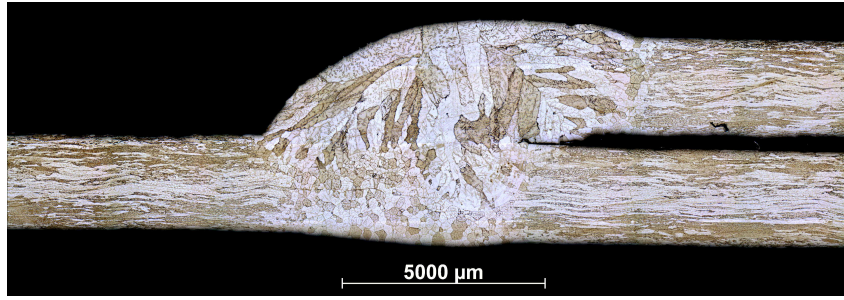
Overlap arc welding of hot rolled Duplex 8Al steel sheets using G3Si wire.
